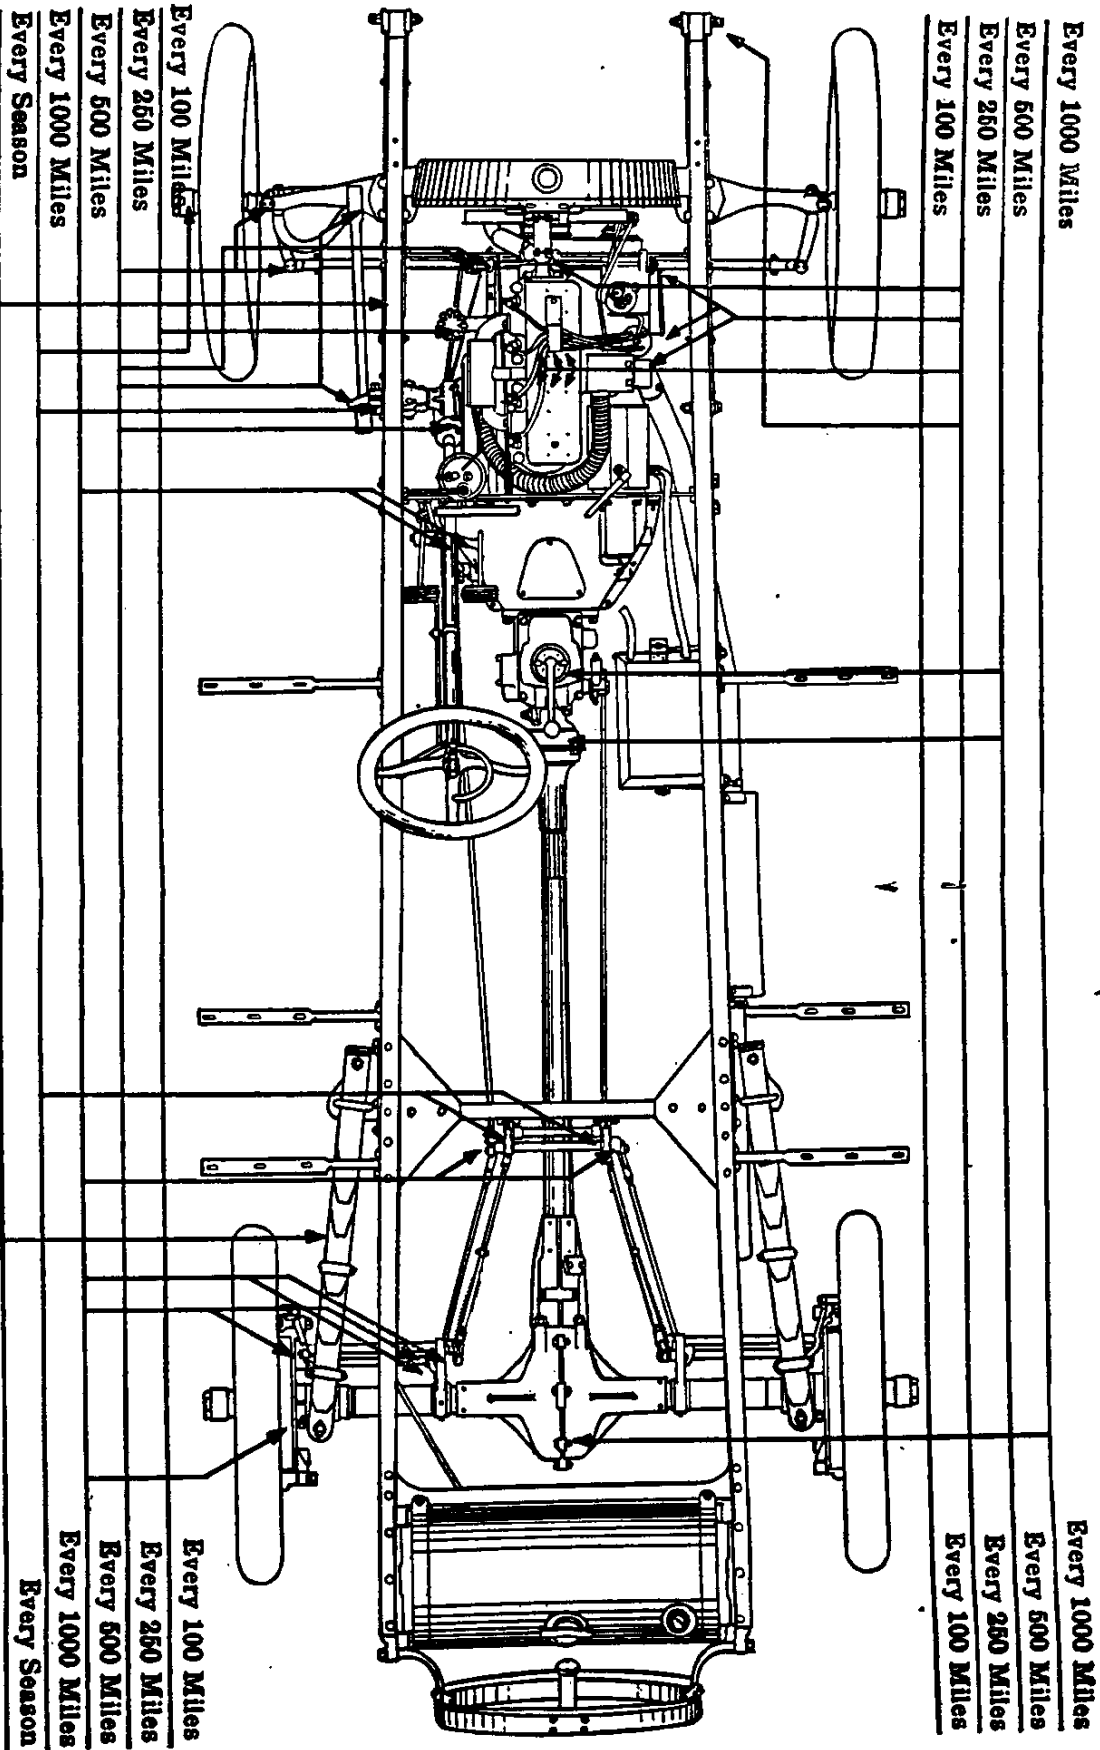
Lubricating chart for Chevrolet "Model F-B" Chassis.
